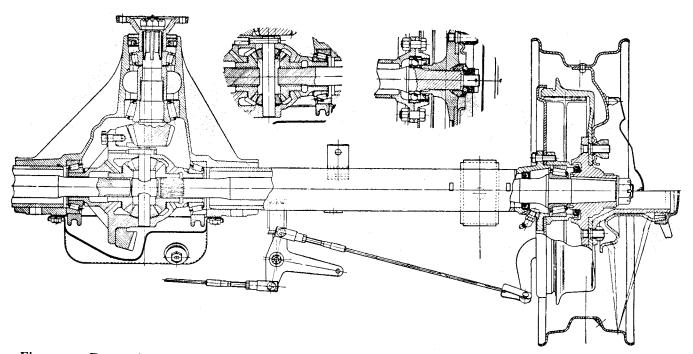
Rear axle section (inserts indicate axle arrangement for cars up to Commission No. T.S. 1300).
